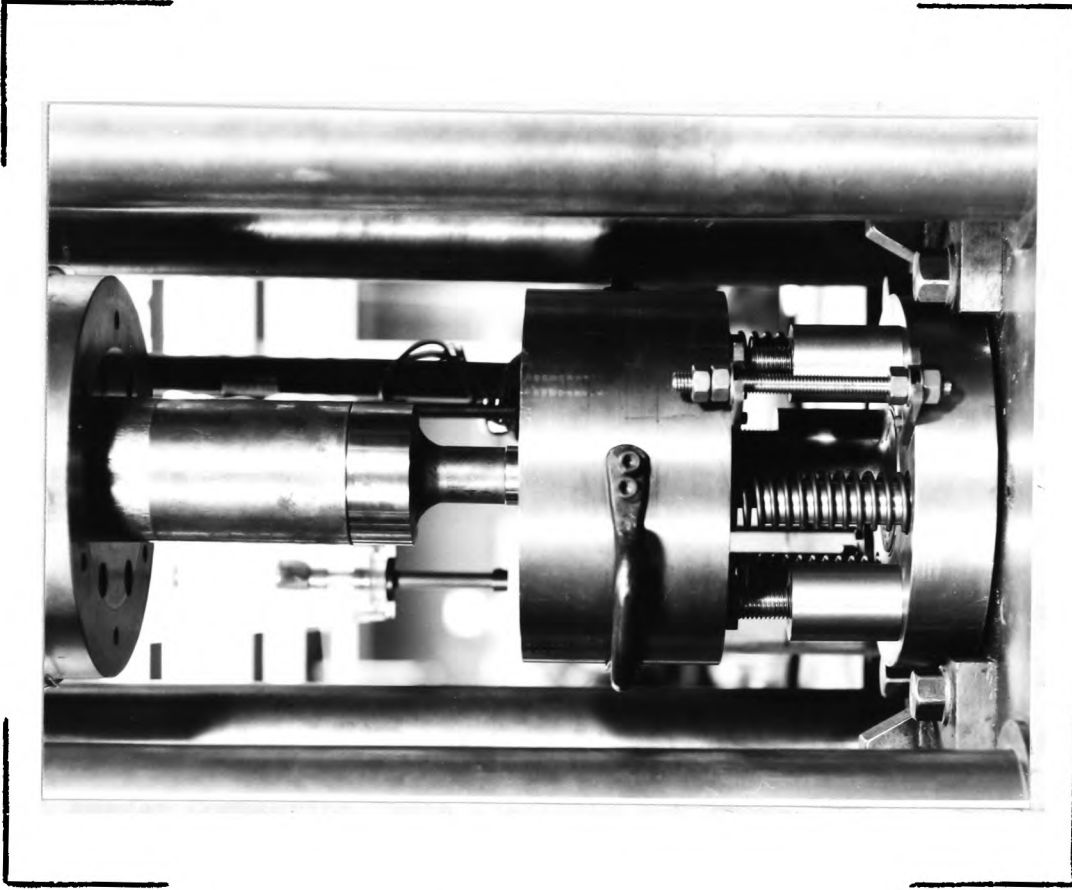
"FLOATING DIE" TOOL USED IN SINGLE-
